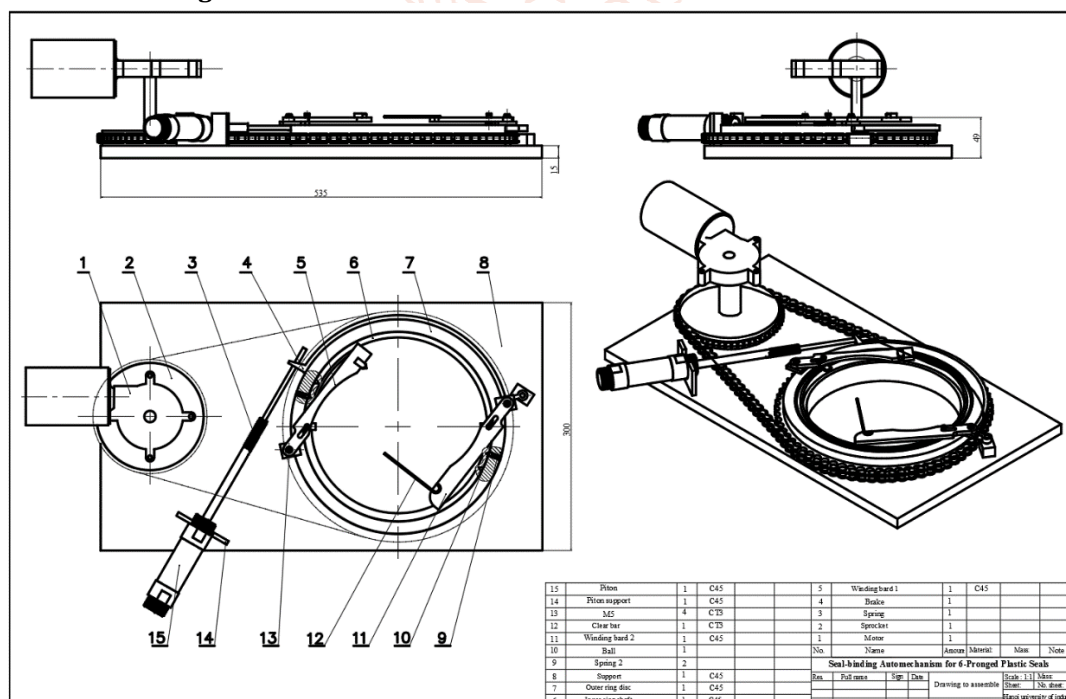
Drawing to assemble the automatic seal-winding mechanism
